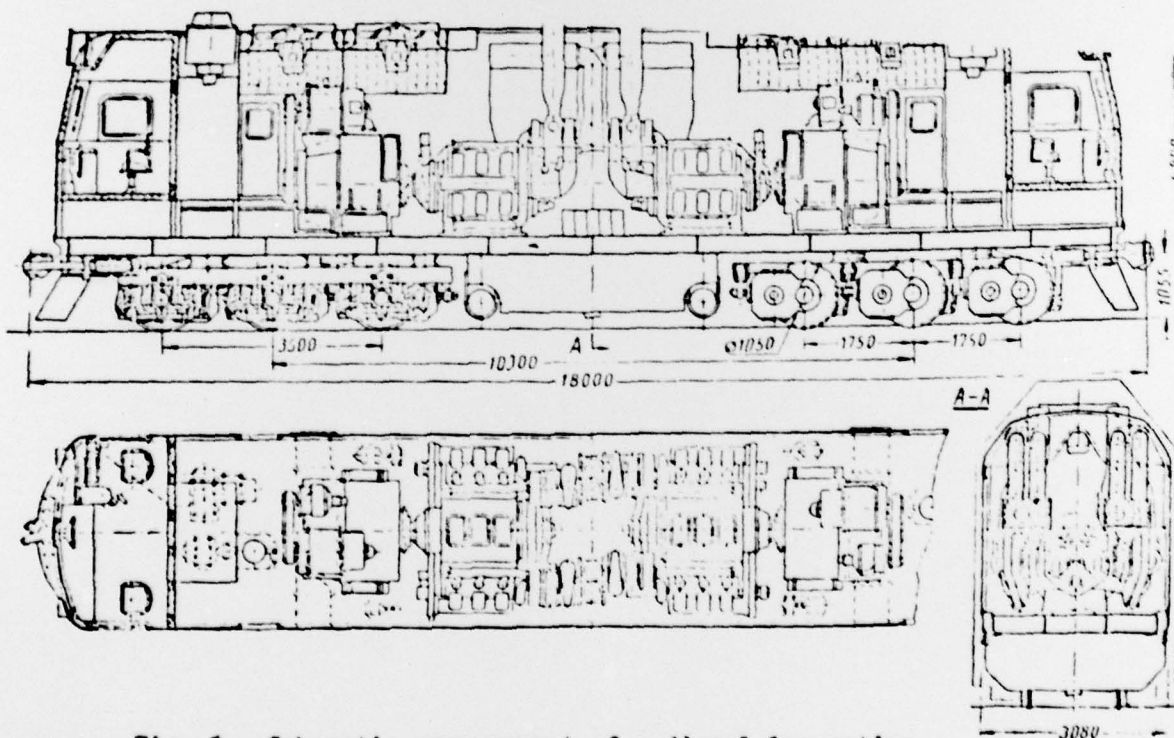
Schematic arrangement of a diesel locomotive, 6000 hp in a section using X-shaped D49 engines
